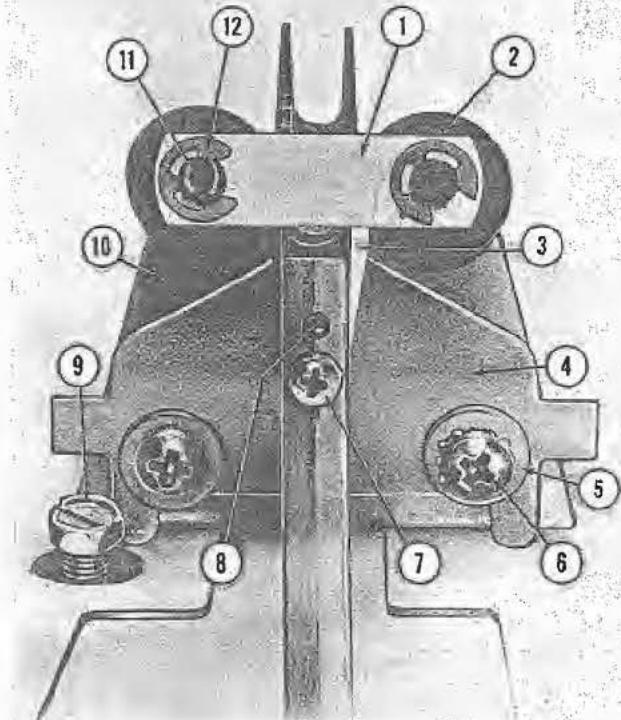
BRACKET AND ROLLER ASSEMBLY, LIFT ARM GUIDE, 2400
